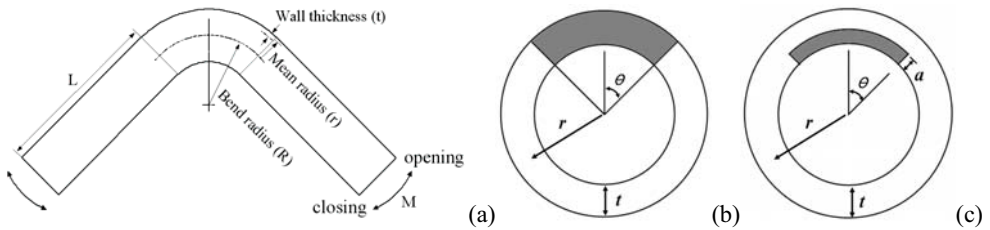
Relevant variables for (a) pipe bends with attached straight pipes, (b) circumferential through wall crack, and (c) circumferential part-through surface crack.
